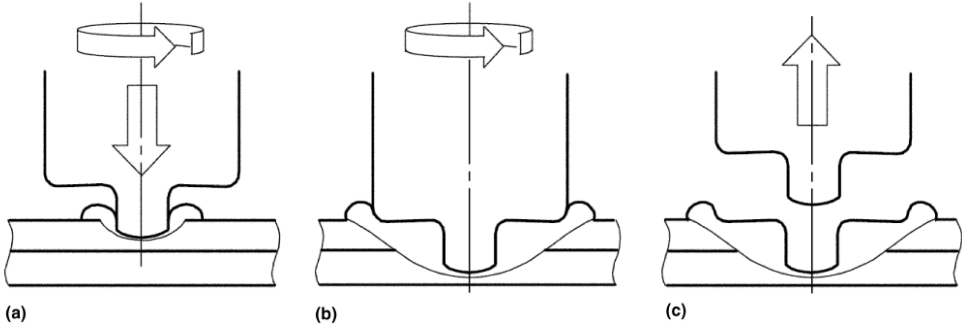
A schematic of a plunge type FSSW (a) plunging (b) bonding (c) drawing out [28].
